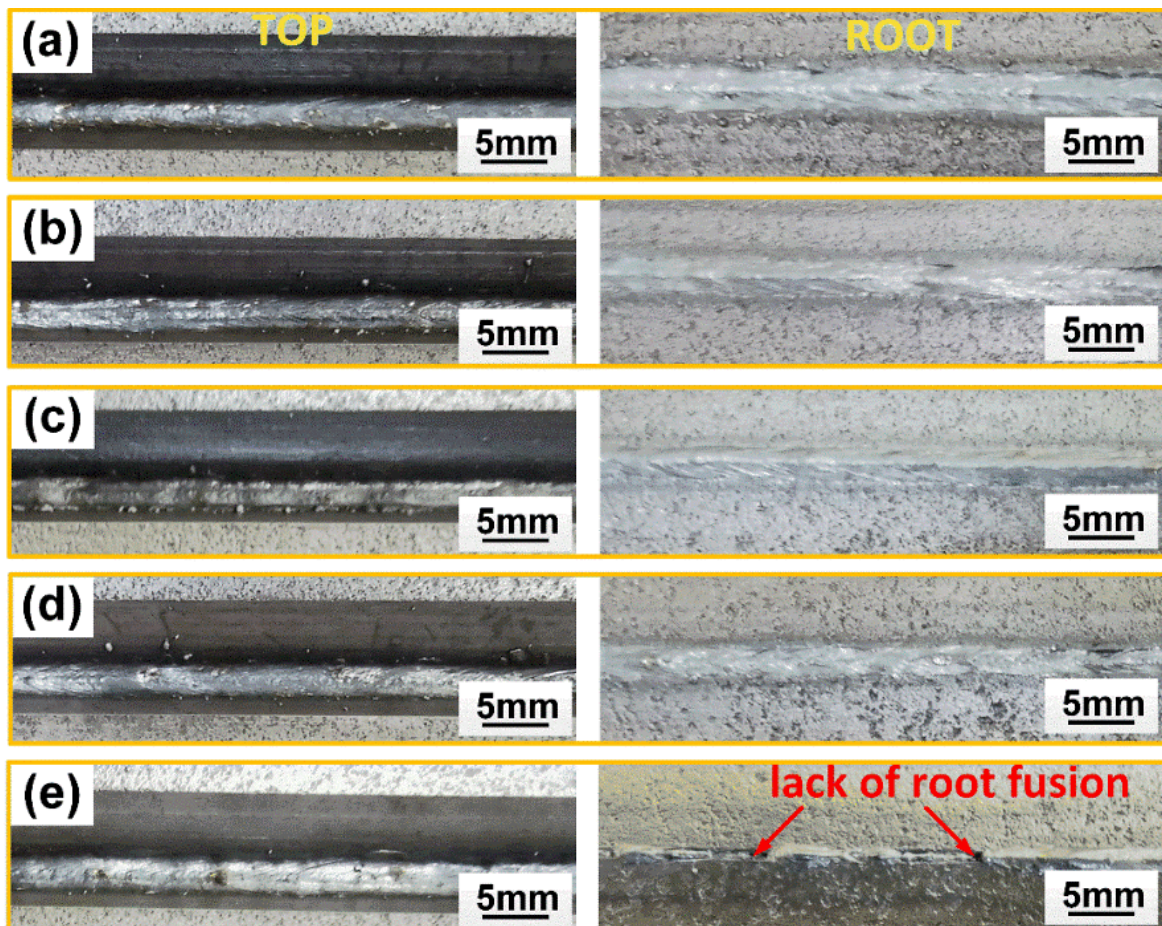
Weld surface morphologies on top and back of the welds: (a) static-spot laser weld,  $v = 1.0$  m/min; (b) wobble laser weld,  $v = 1.0$  m/min,  $A = 0.5$  mm; (c) wobble laser weld,  $v = 1.0$  m/min,  $A = 1.0$  mm; (d) static-spot laser weld,  $v = 1.5$  m/min; (e) wobble laser weld,  $v = 1.5$  m/min,  $A = 0.5$  mm.
